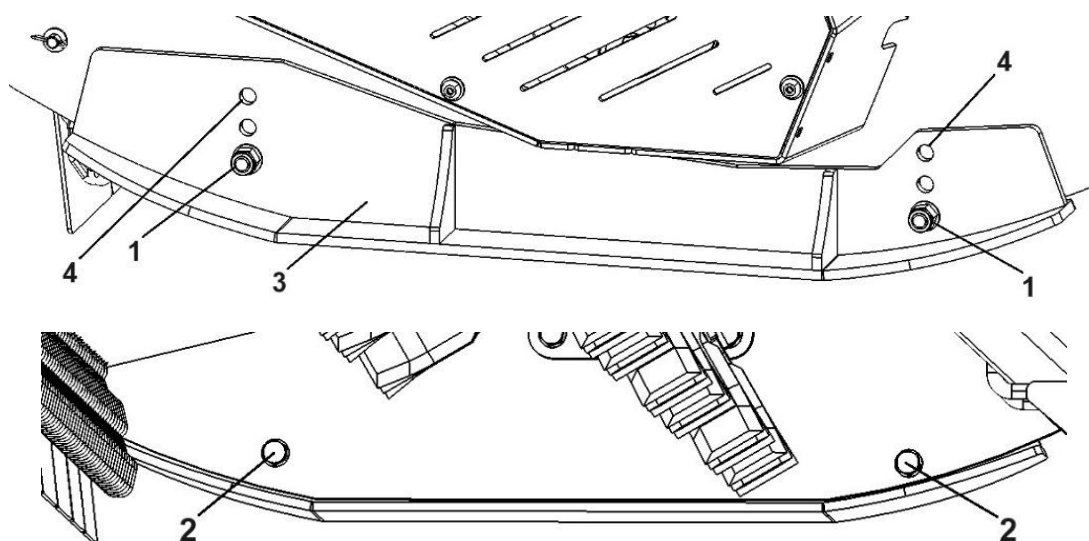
Adjusting the position of the side skids: 1 – fastening nuts, 2 – fastening bolts, 3 – skid, 4 – adjustment holes
